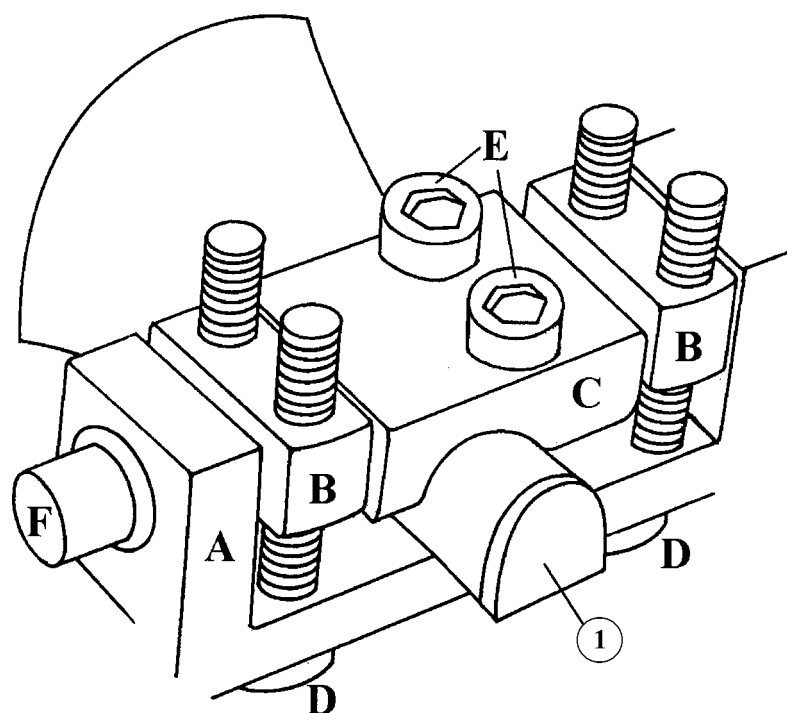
Type 1 device for providing the connecting link between the tensile testing machine and the heel stem
